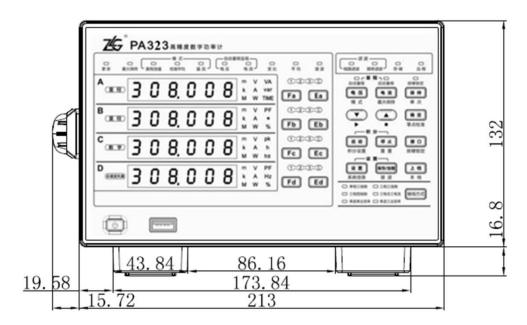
Mechanical dimension drawing of PA323 power meter (front view)
